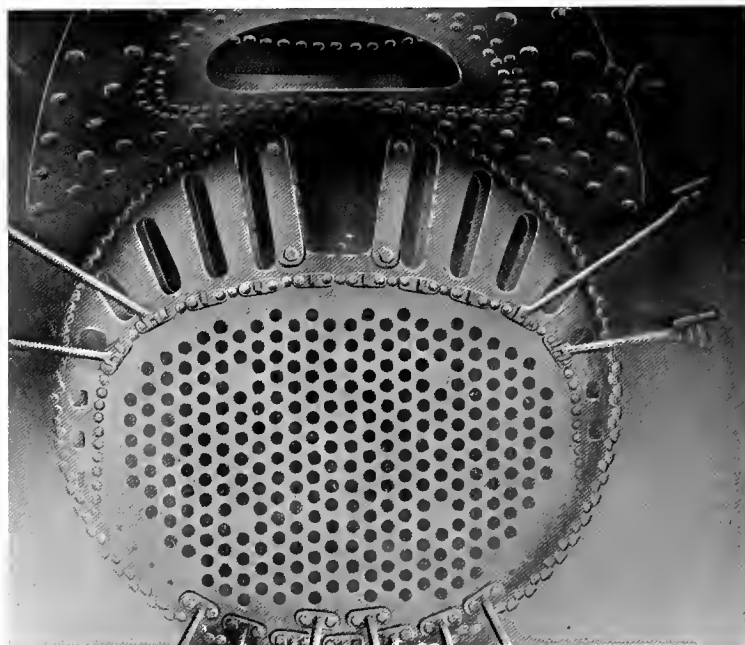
Back tube-sheet in Jacobs-Shupert boiler as used in Tests Series B, viewed from the barrel of the boiler. The partition was converted into this tube-sheet by cutting openings with the oxyacetylene flame.
